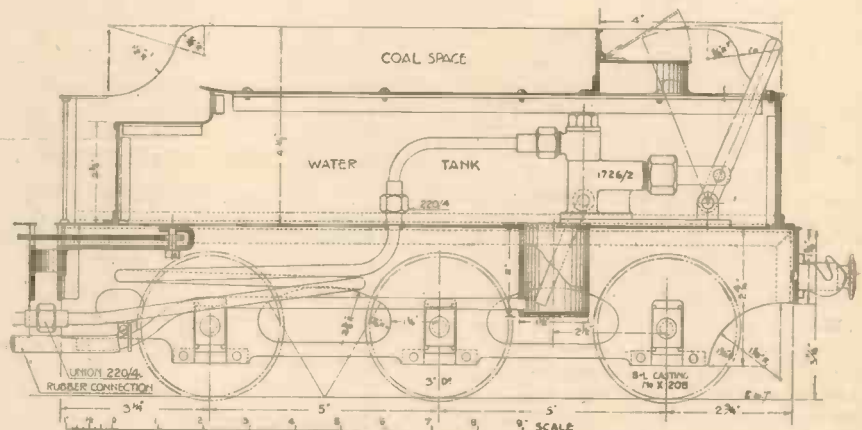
Longitudinal section of the tender, showing the position of the hand pump.
